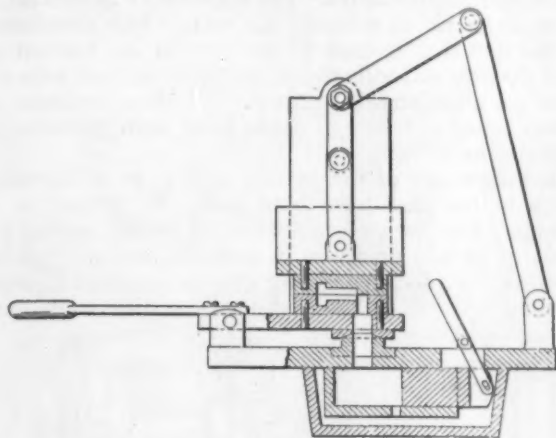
UNDERWOOD DIE-CASTING MACHINE.
